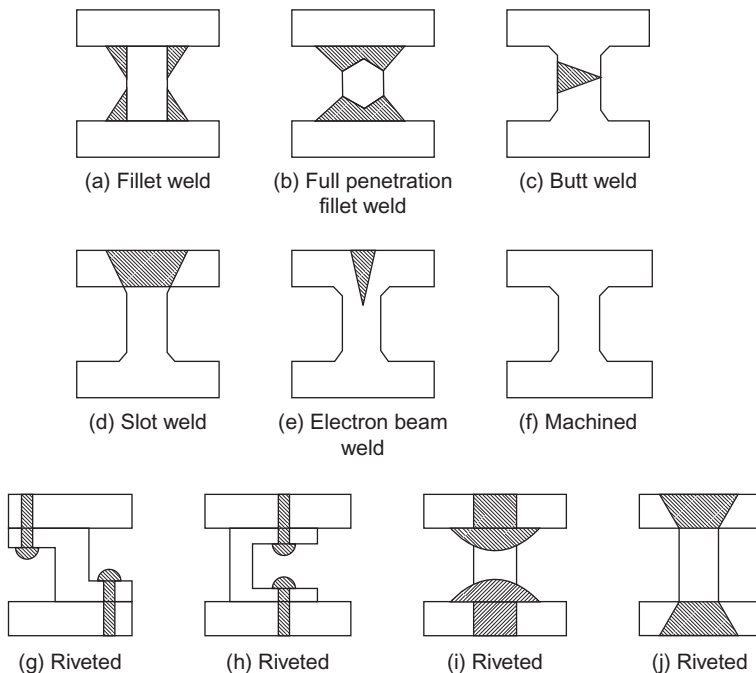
Several fabrication techniques for centrifugal impellers.
